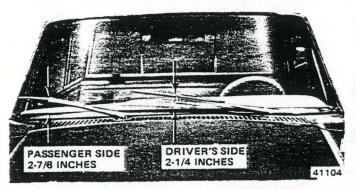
T-7 Wiper Arm Park Location Measurements (Inches)
